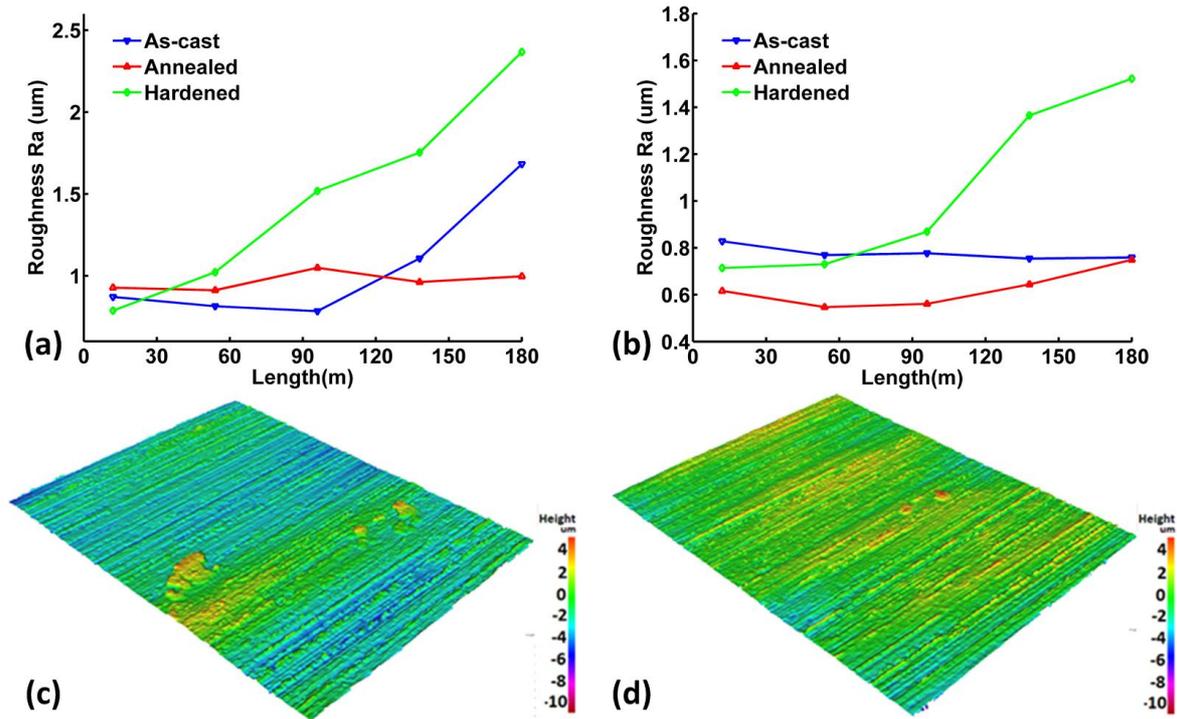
Surface roughness R_a and 3D surface profile produced by pcBN and bcBN cutting tools on as-cast materials in higher C-Si.
